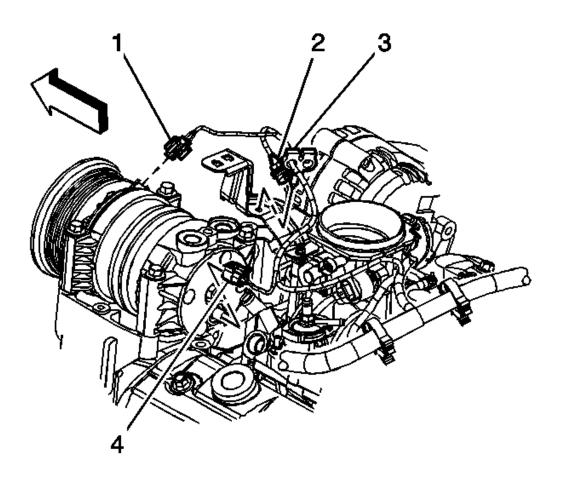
View Of A/C Compressor Clutch, A/C Pressure Switch & EGR Valve Courtesy of GENERAL MOTORS CORP.
